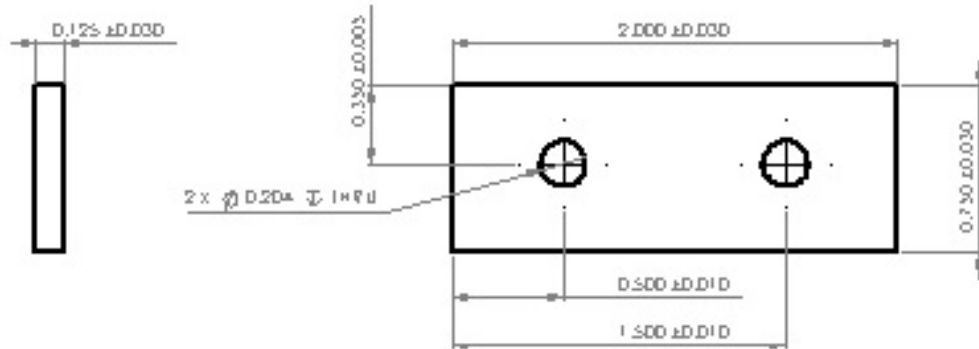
The top piece clamping the blade flexure to the O-frame.
